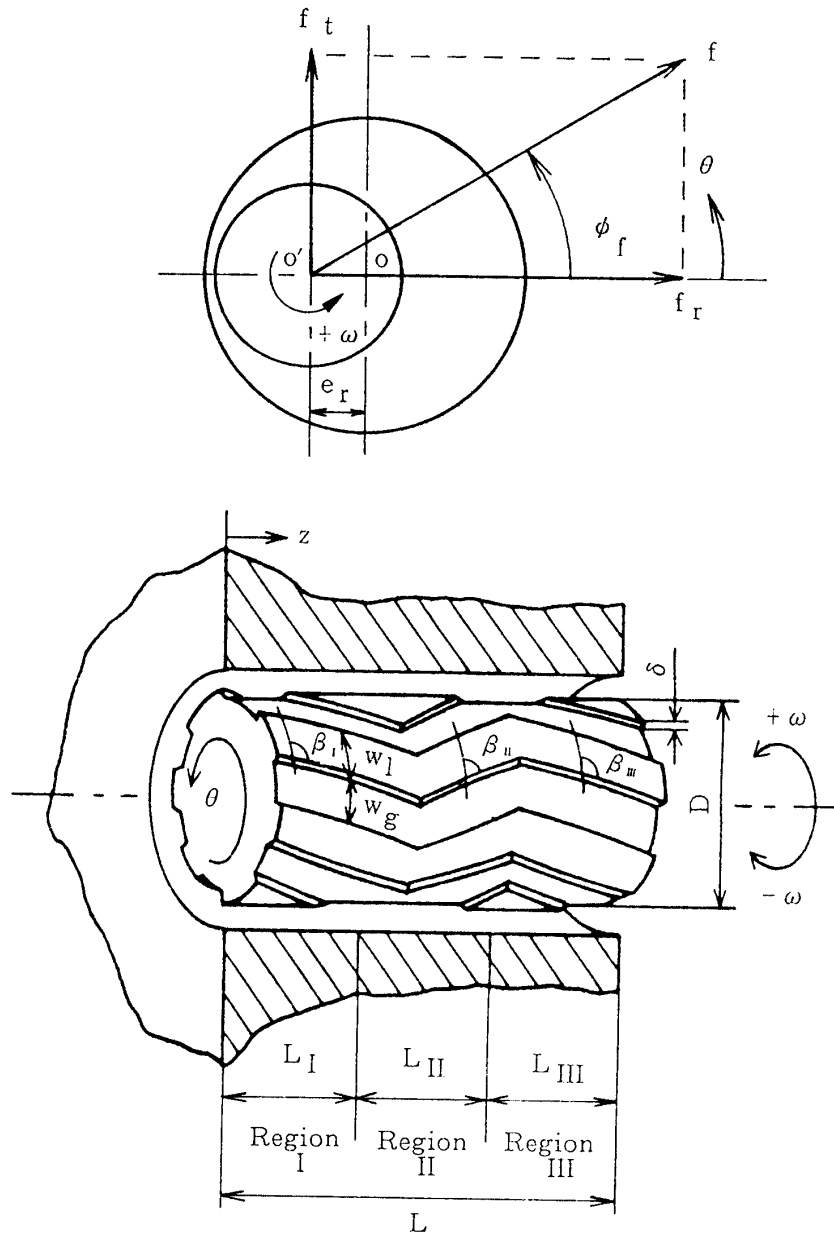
The reversible rotation type herringbone grooved journal bearing.
